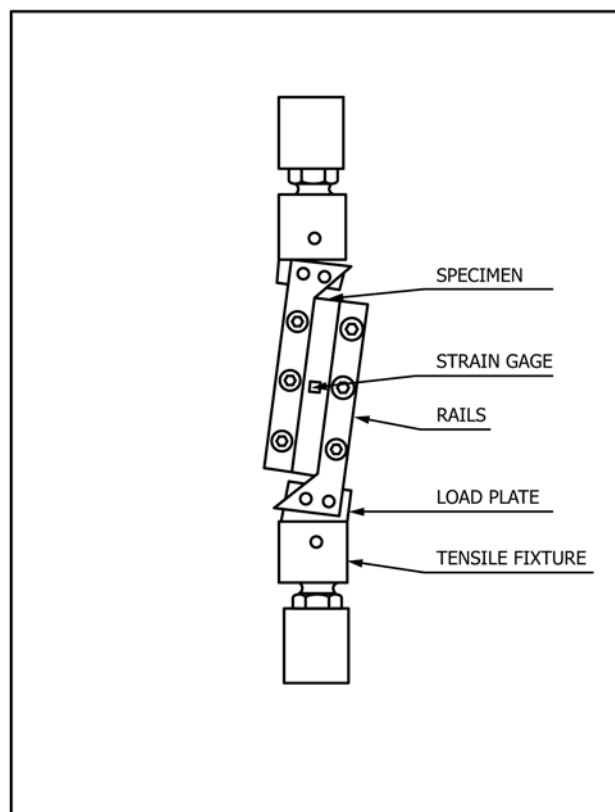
Procedure A Assembly Rail Shear Apparatus
